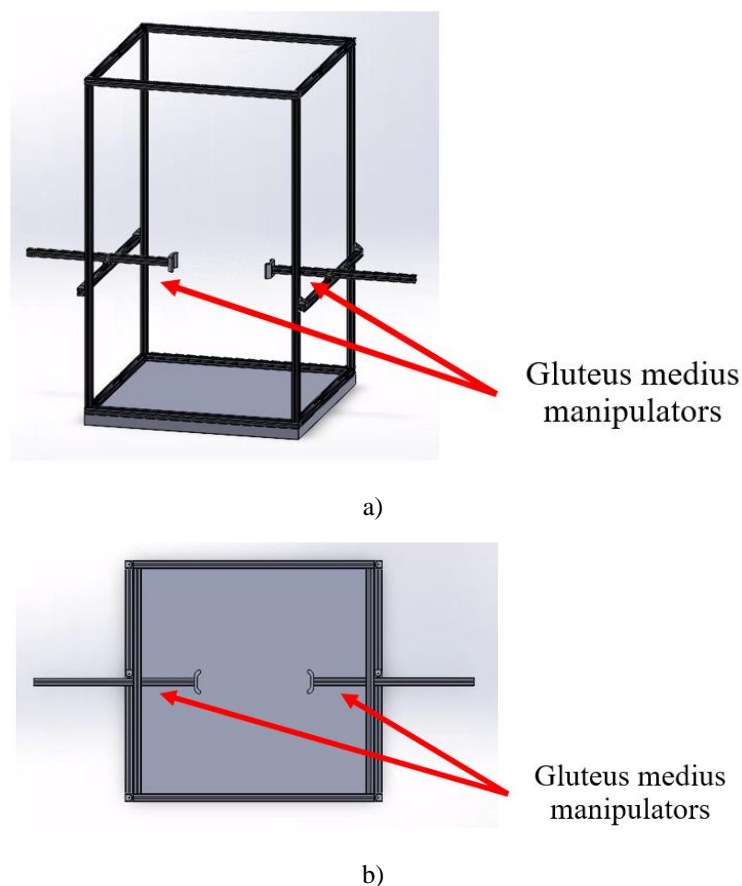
Design of gluteus medius manipulators, a) oblique view and b) top view.
